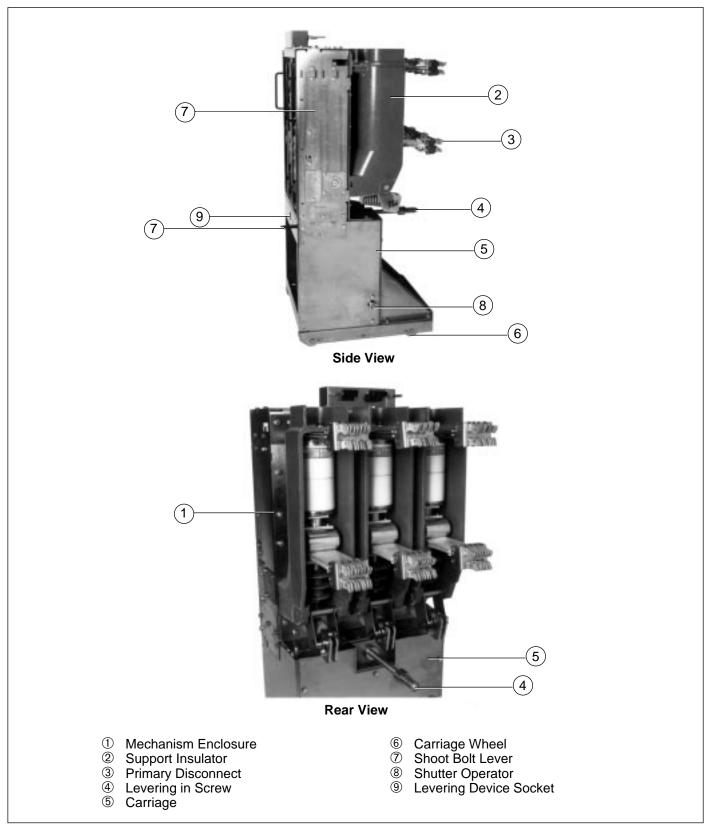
Side and rear external view W-VAC breaker with carriage assembly for single tier switchgear
